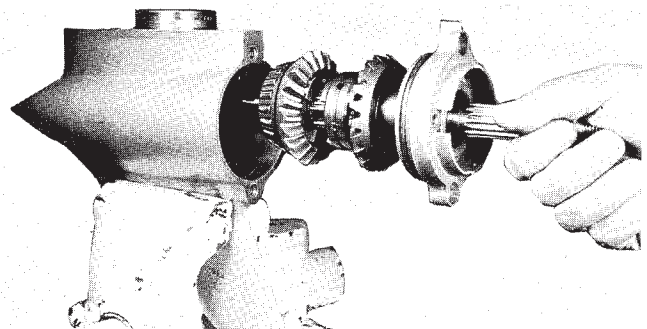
INSTALLING BEVEL GEAR BEARING
